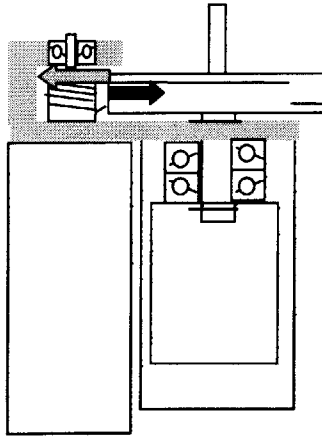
Proposed scheme extending the motor bracket to support the shaft of the rotary axis motor.
